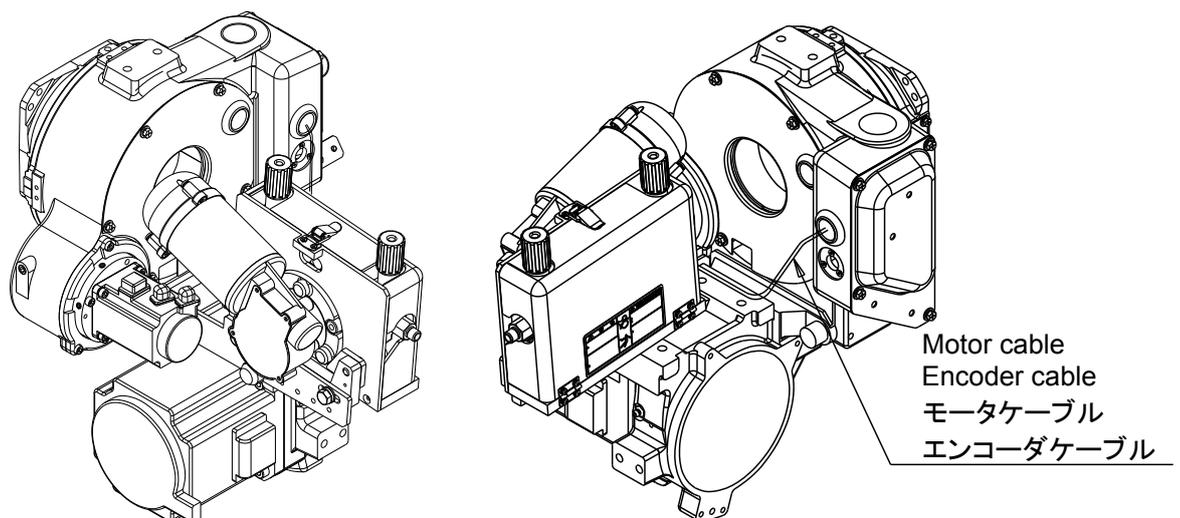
Mounting of manipulator fixing bracket and wire feeding unit (Procedure (9))
